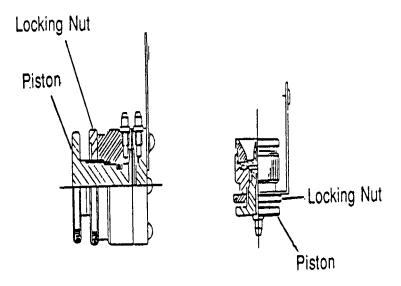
Locking nut and Piston of Diaphragm Pump Assy
